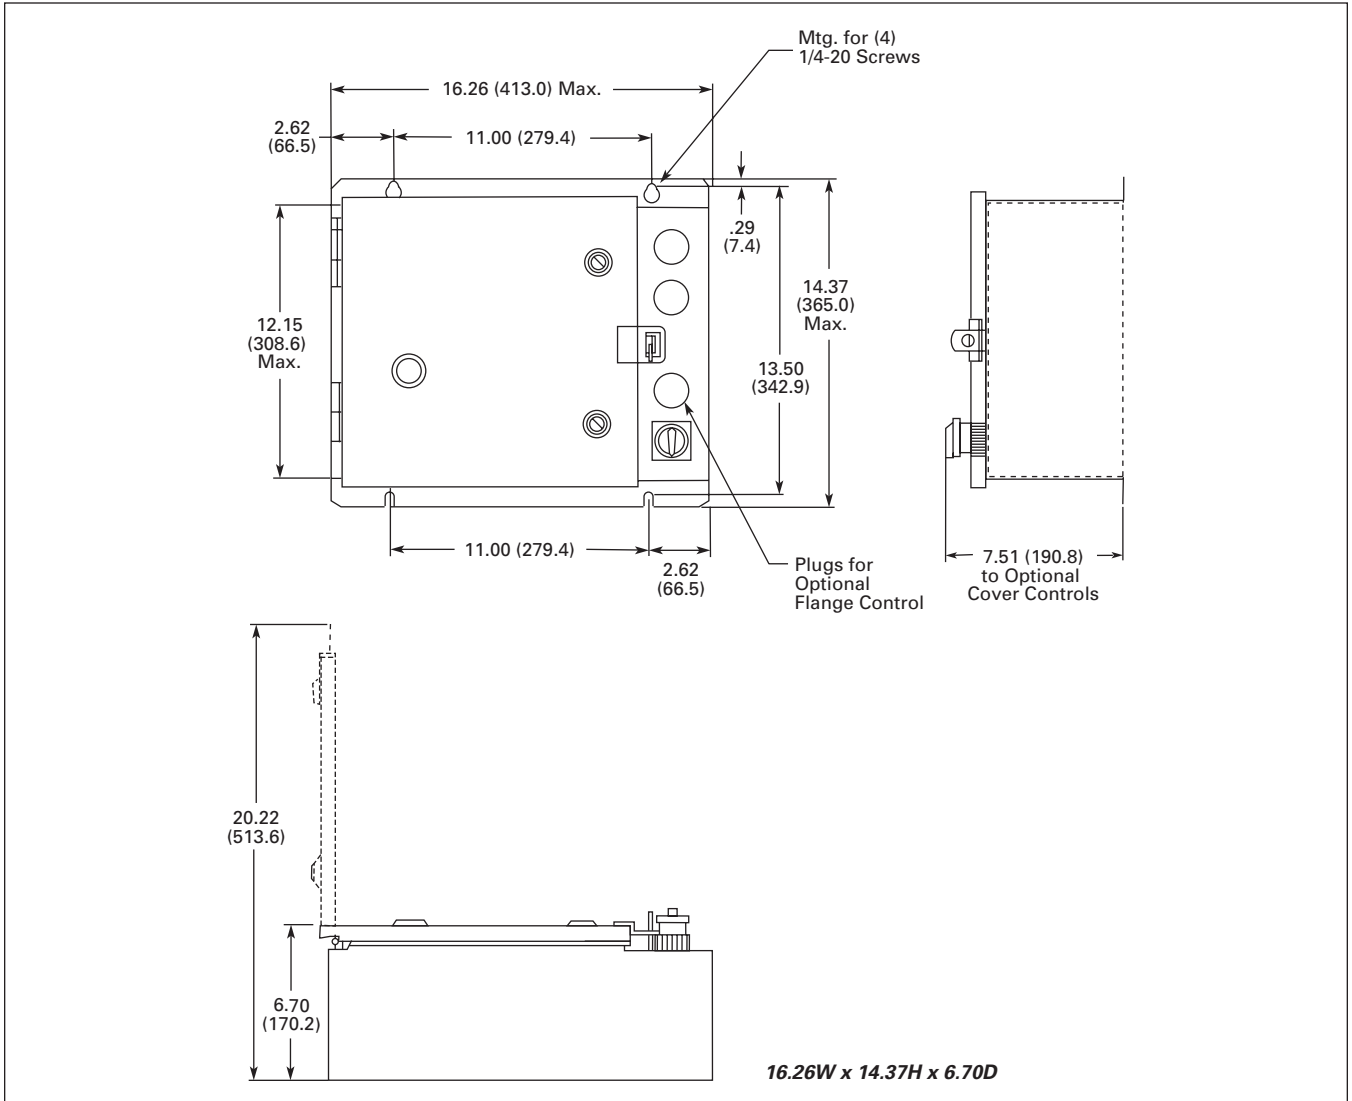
Box 7, Type 1 — Approximate Dimensions in Inches (mm)
